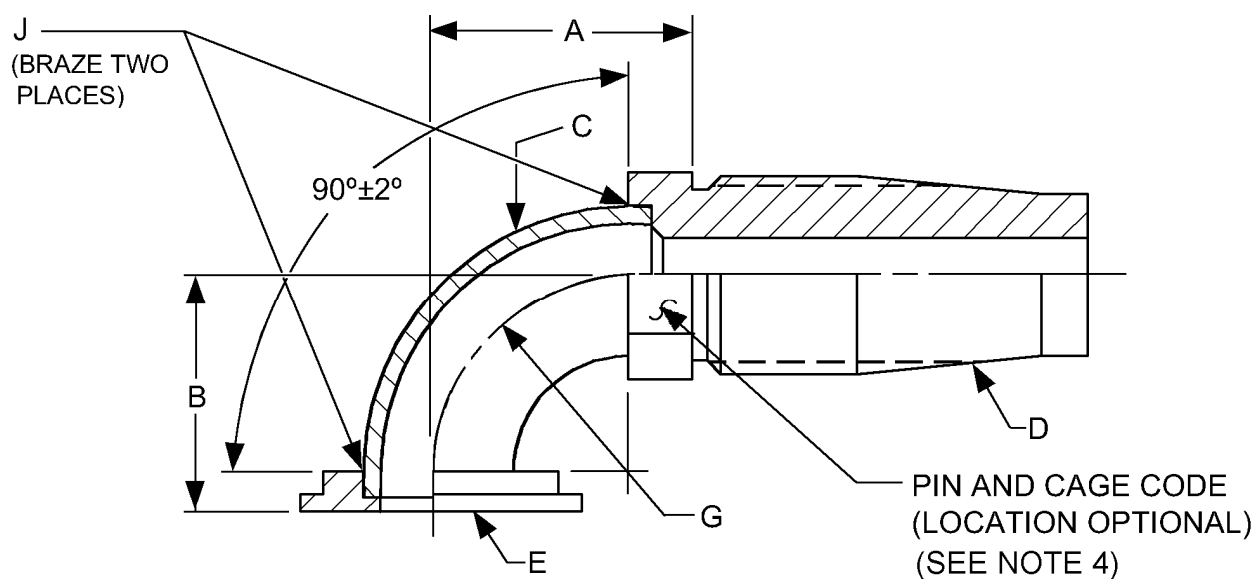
90° Flange nipple assembly dimensions and configuration.
